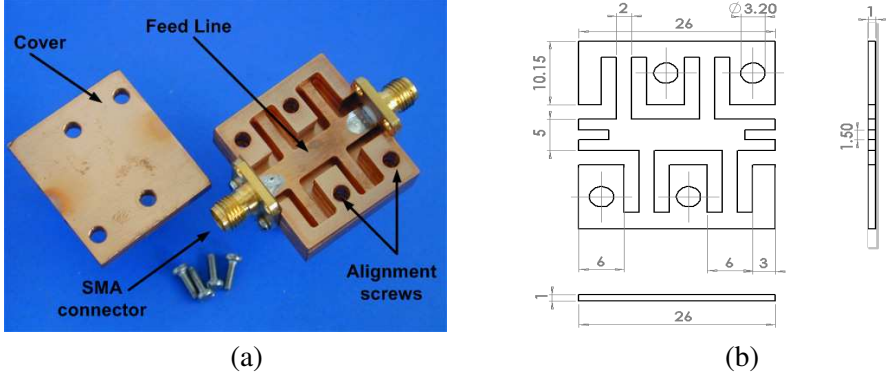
Coaxial feed line in a *back-to-back* configuration (a) Photograph of the coaxial feed line. (b) Technical drawing of the coaxial feed line, layer 3 (dimensions in millimeters).
